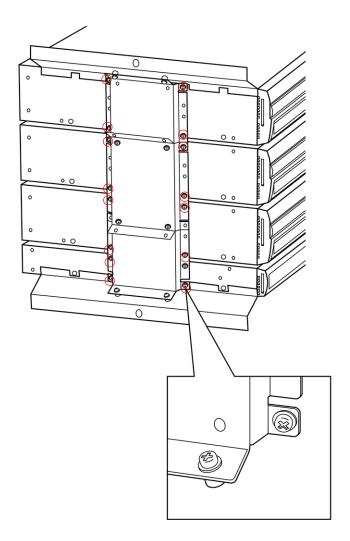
Attach Stand Mount Brackets to Chassis with Screws (CHS1U-US+CHS2U-USx3 Configuration)
